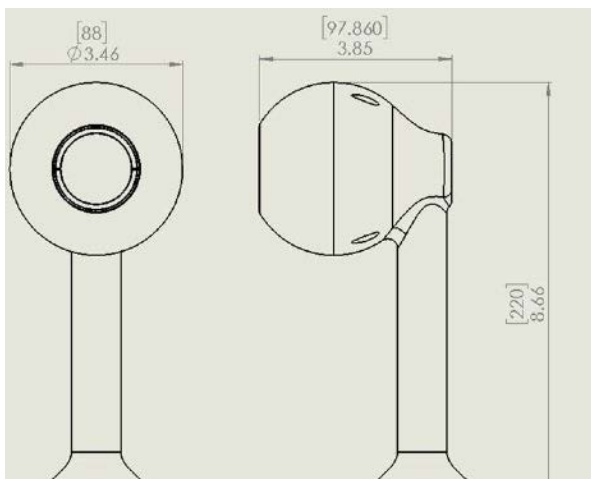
The dimensions 88mm (3.46 inches) by 98mm (3.85 inches), the pole 220mm (8.66 inches) could be longer, shorter or curved
